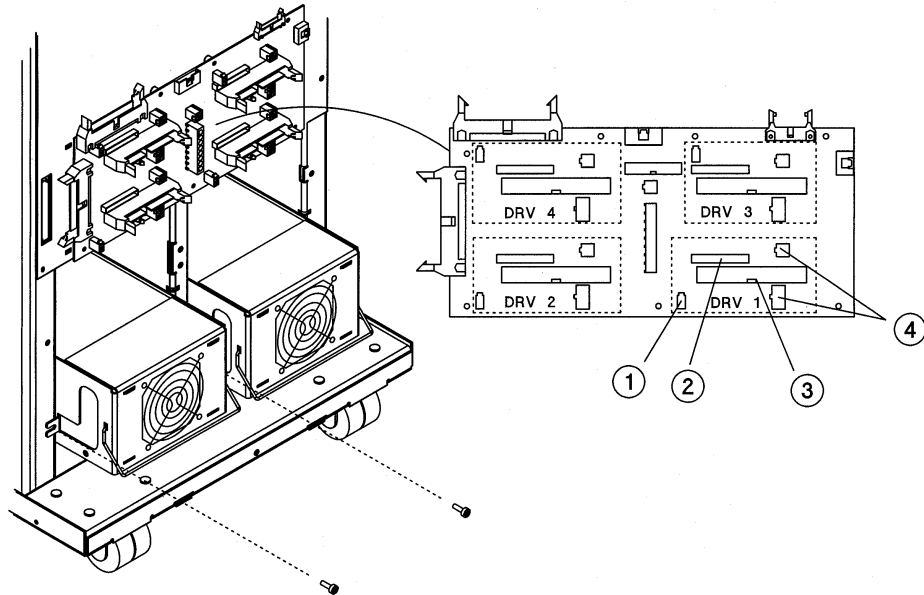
Removing the Drive From the Drive Enclosure
